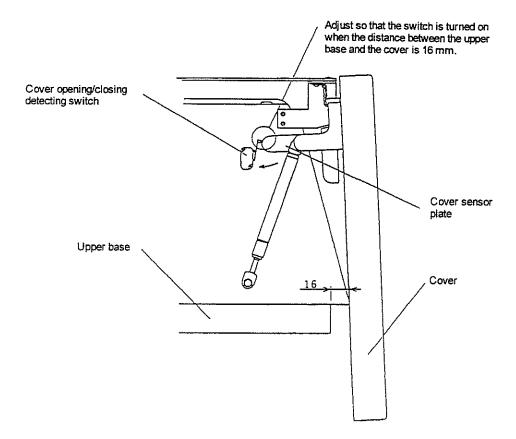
Adjustment of Cover Opening/Closing Detecting Switch
